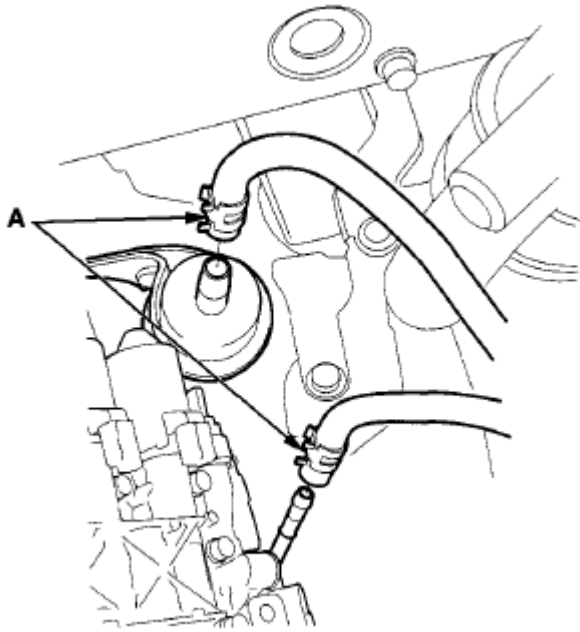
Disconnecting ATF Cooler Hoses From Transmission
